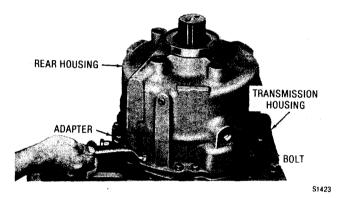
Removing rear housing bolts (TRT 2221-3, 2421-3 with underdrive)
